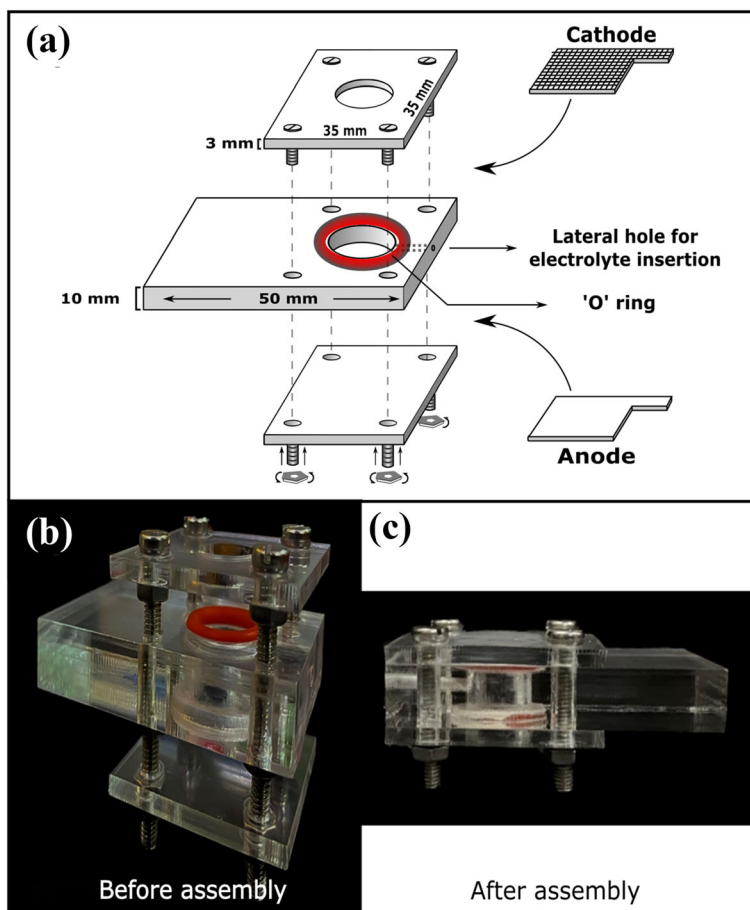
(a) A digital drawing depicting setup details. Real photos of the setup (b) before and (c) after assembly.
